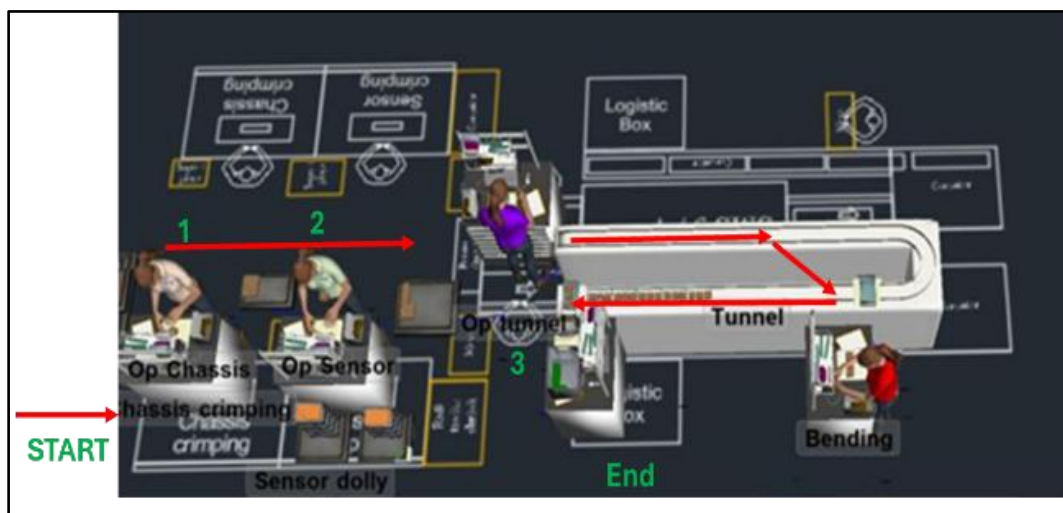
Optimized Assembly Line Layout After Workforce Rebalancing.
